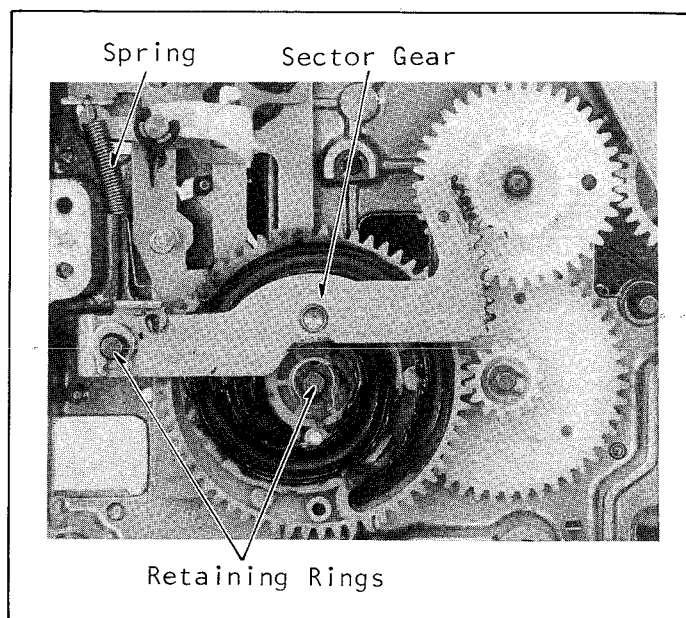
Adjustment of Cam Gear and Mode Select Switch - (4)
